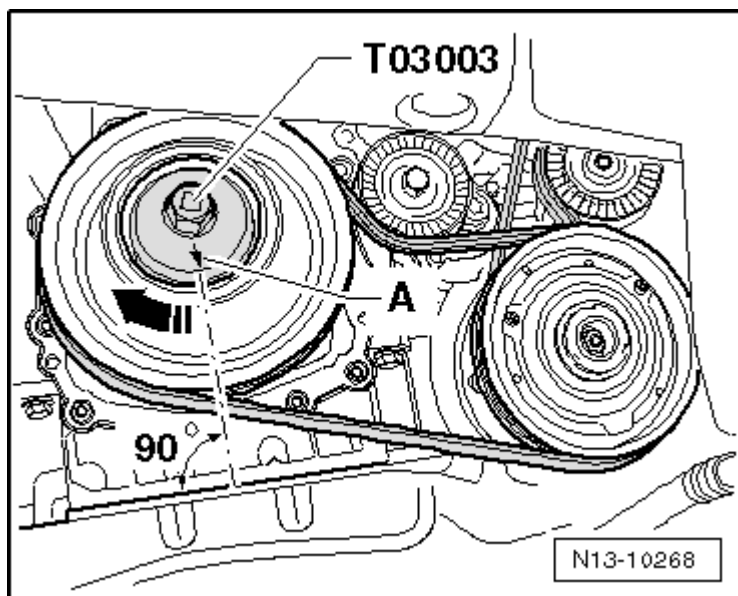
Attaching Wrench T03003 On To Bolts Of Belt Pulley
